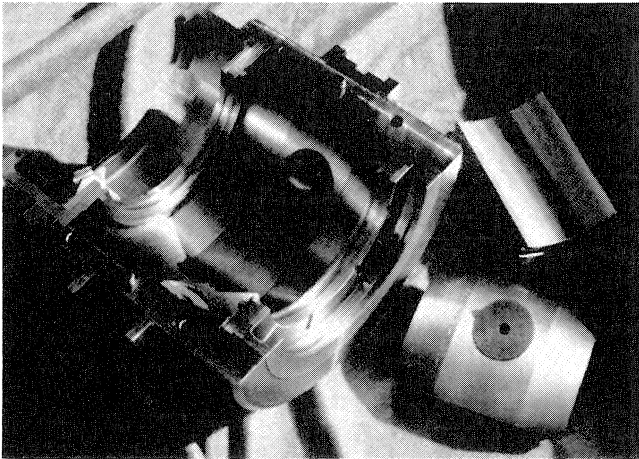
New Bearing Showing Ball and Socket Pivots Behind Pads.
